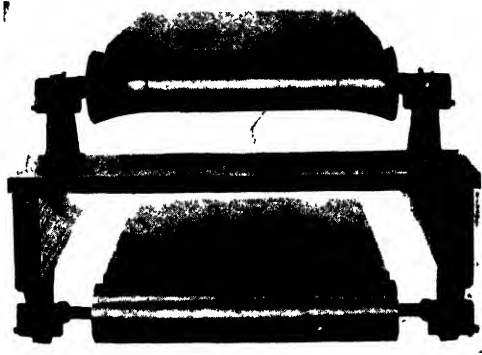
Uniroll Flared Idler with Oil Lubrication. (Link-Belt Company.)
